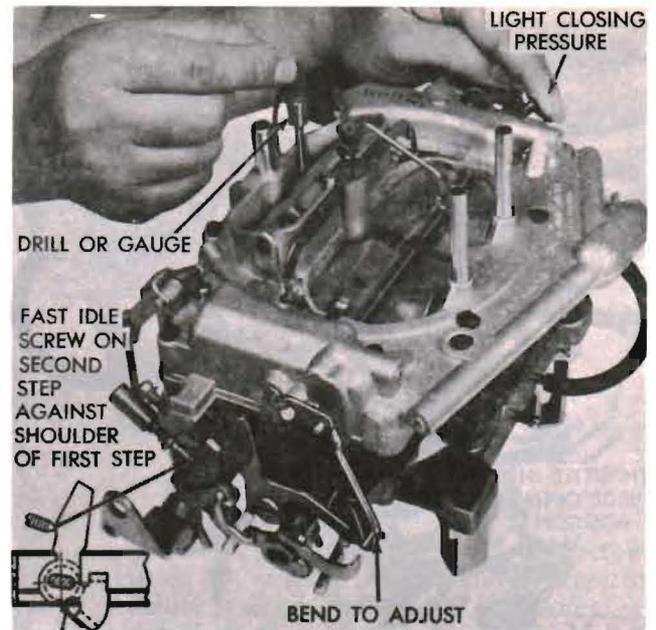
Adjusting Fast-Idle Cam and Linkage—Slide 2198 & 2199
